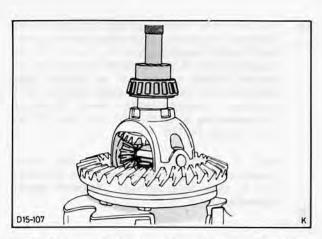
Fit taper roller bearing with special tool no. 15-031
